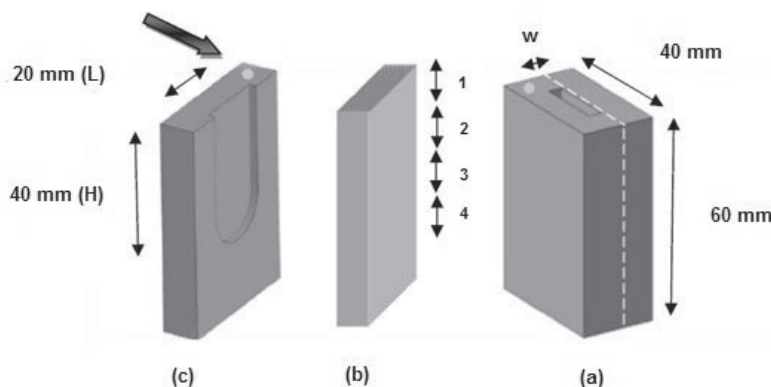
(a) The sample assembly (b) investigated surface and (c) grooved part.
